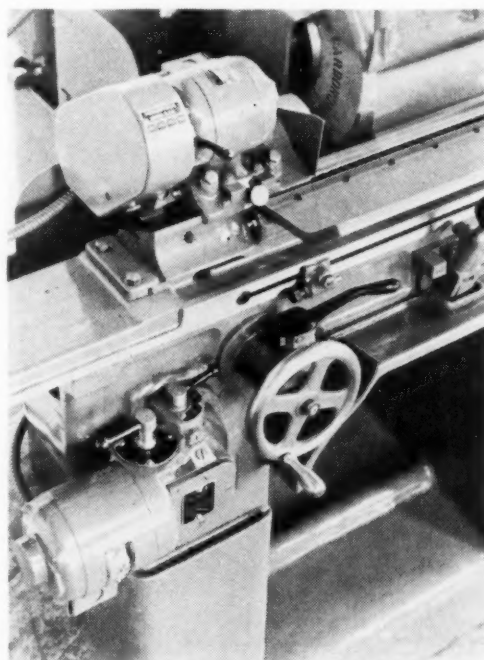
MOTOR MOUNTED ON GRINDING-MACHINE HEADSTOCK
